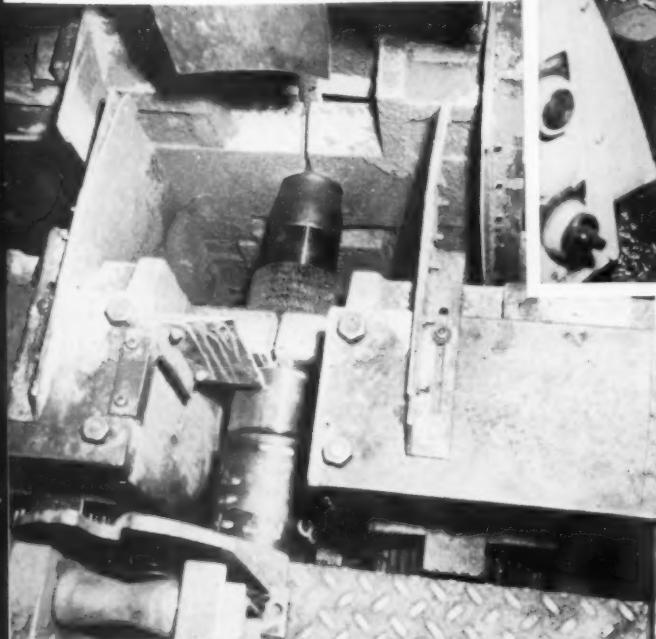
Tool joint box about to be located on tapered plug for welding.
